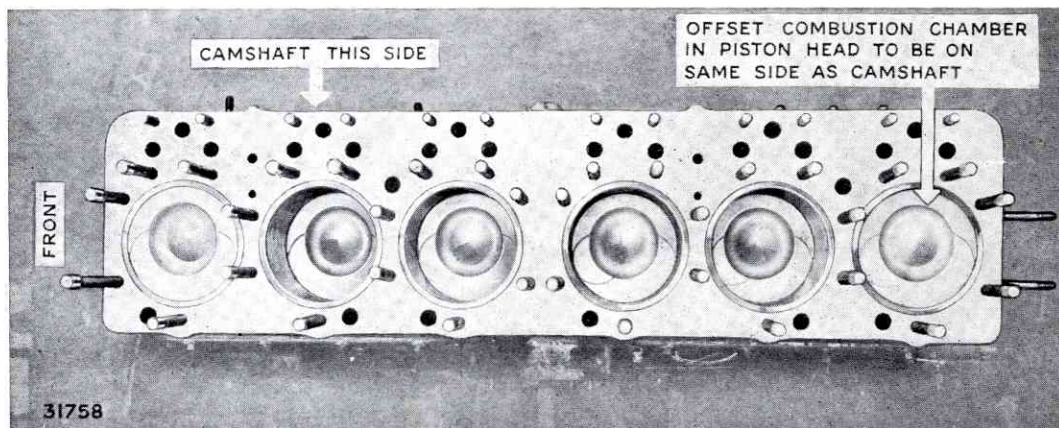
POSITION OF OFFSET COMBUSTION CHAMBERS IN PISTON HEADS, IN RELATION TO THE CAMSHAFT
